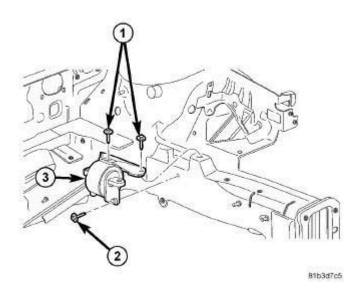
Mount Isolator Bolts Courtesy of CHRYSLER LLC
